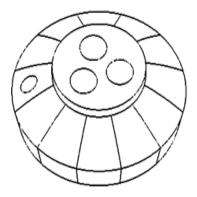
CAD model of precast block furnace cover (casting twelve).
